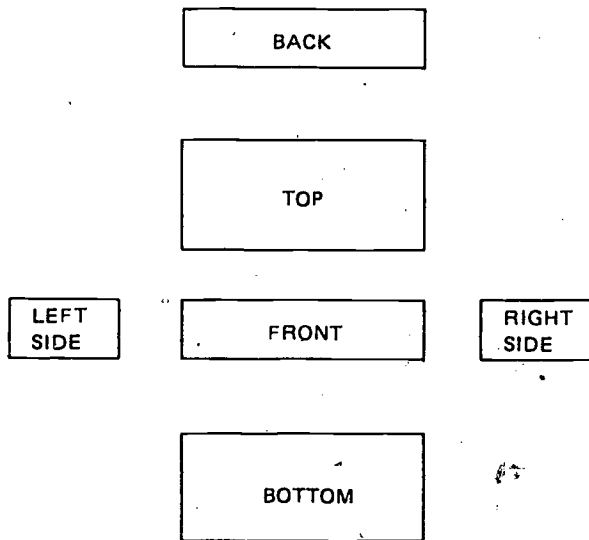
Top and bottom are plan views; side and back are elevation views. Side view is also a profile view.
